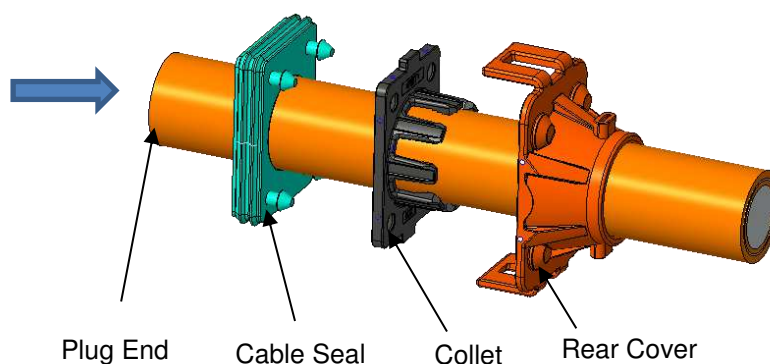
Rear cover, collet, and cable seal loaded on cable.
